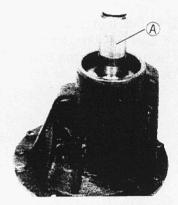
(A) Special tool (Bearing installer 09913-75510)
